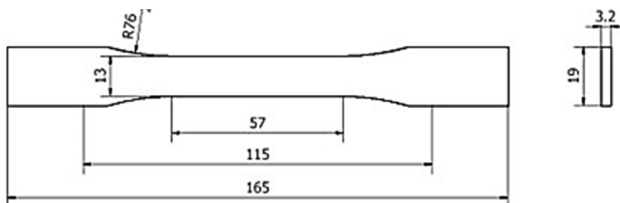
Images of the 3D printing samples with detailed dimensions, including the bottom view on the left and the side view on the right.
